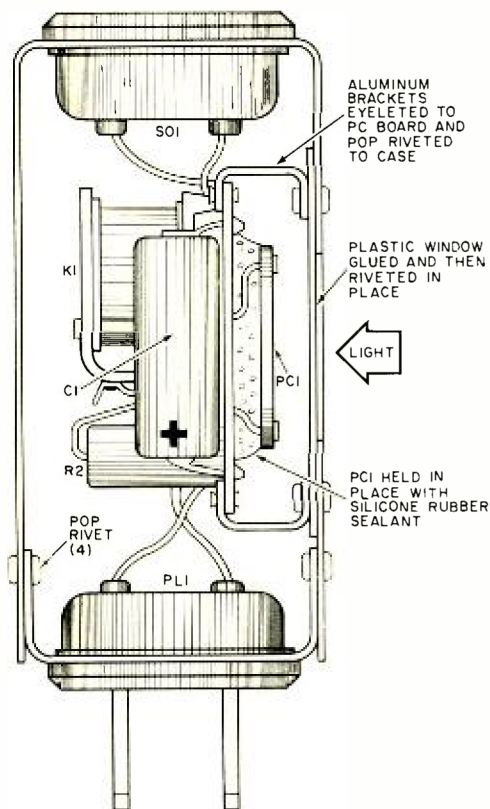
After all the parts are preassembled on the circuit board, and the unit has been fully wired and tested, install the plastic window and pop-rivet the aluminum brackets to the case shield.
